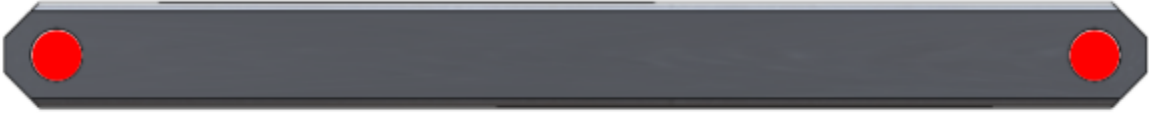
The mounting holes for the 1/4" bushings on the legs, marked in red.
